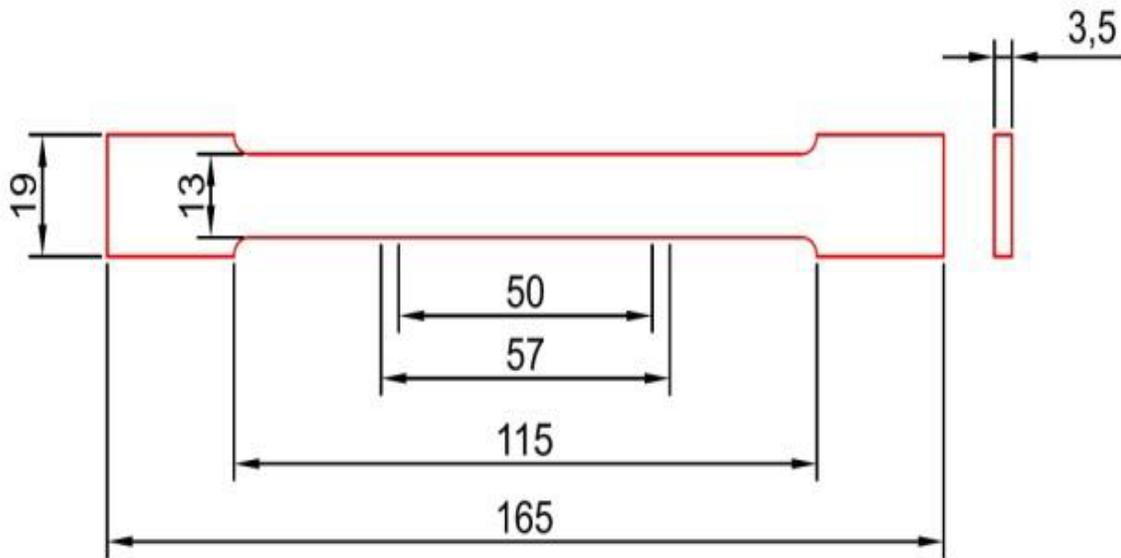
Standard dimensions of tensile samples [ASTM].
